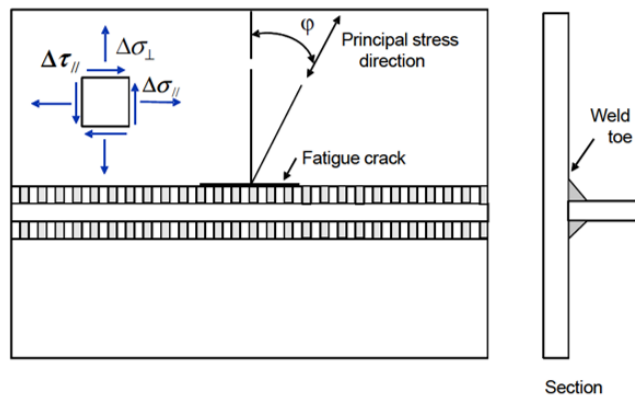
Fatigue cracking along weld toe [12]
